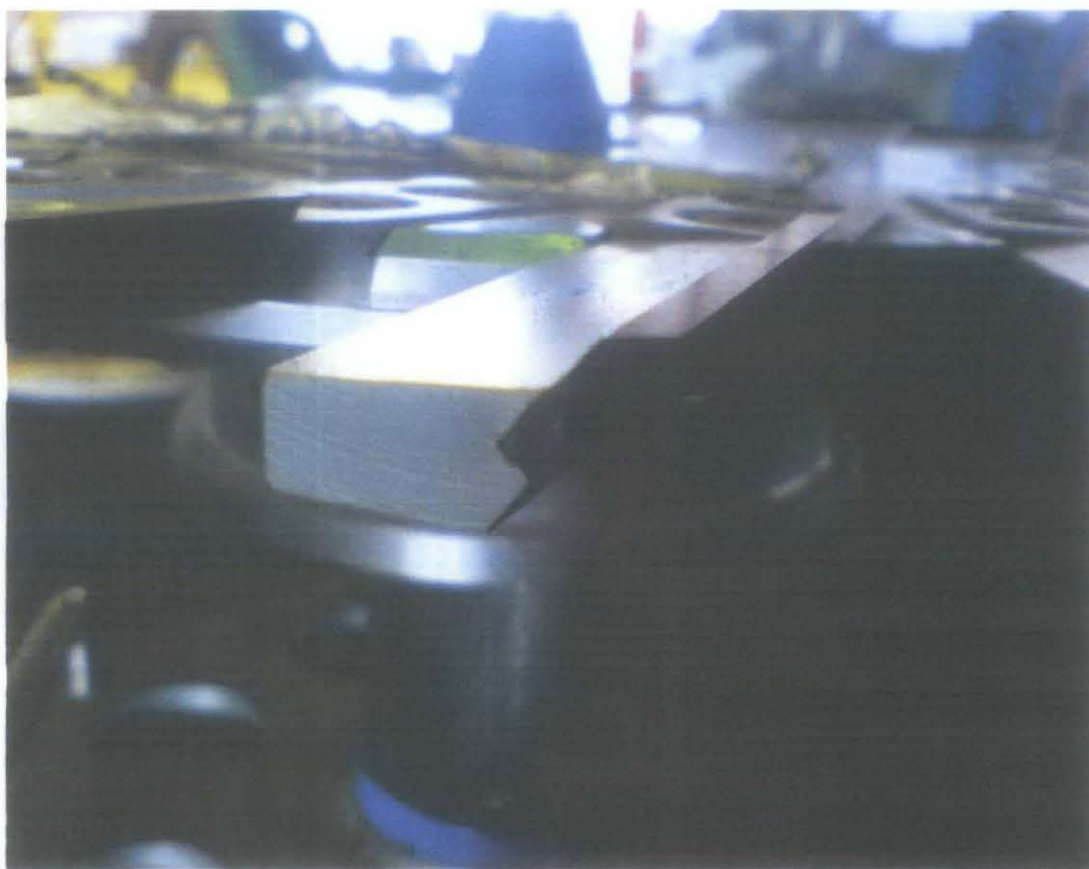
Close-up view of the cutter blade; titanium carbide tip (darker) bonded to stainless steel tip holder (lighter).
